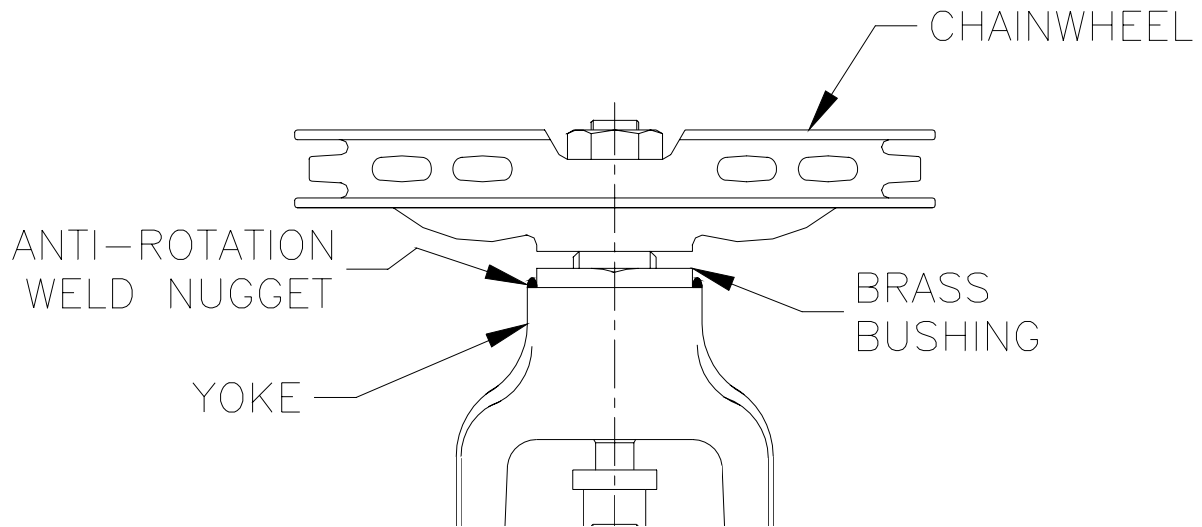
Yoke, Bushing and Weld Nugget Assembly
